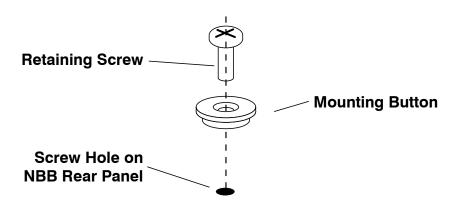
Attaching Mounting Buttons to the NBB Unit
